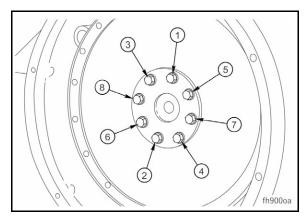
USE THE BARRING TOOL TO HOLD THE FLYWHEEL AND TIGHTEN THE CAPSCREWS
